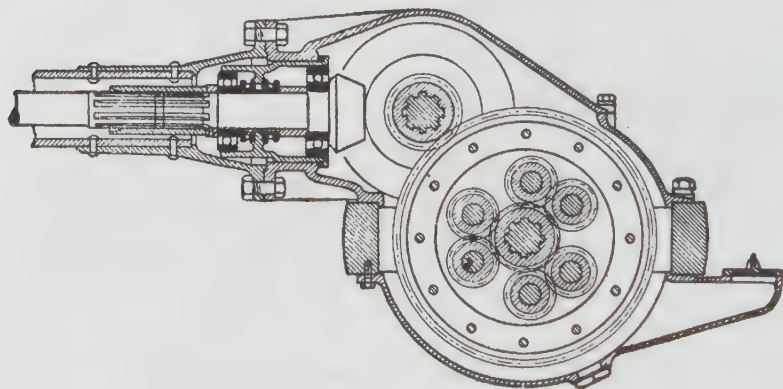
KARRIER BEVEL-SPUR DRIVE.
